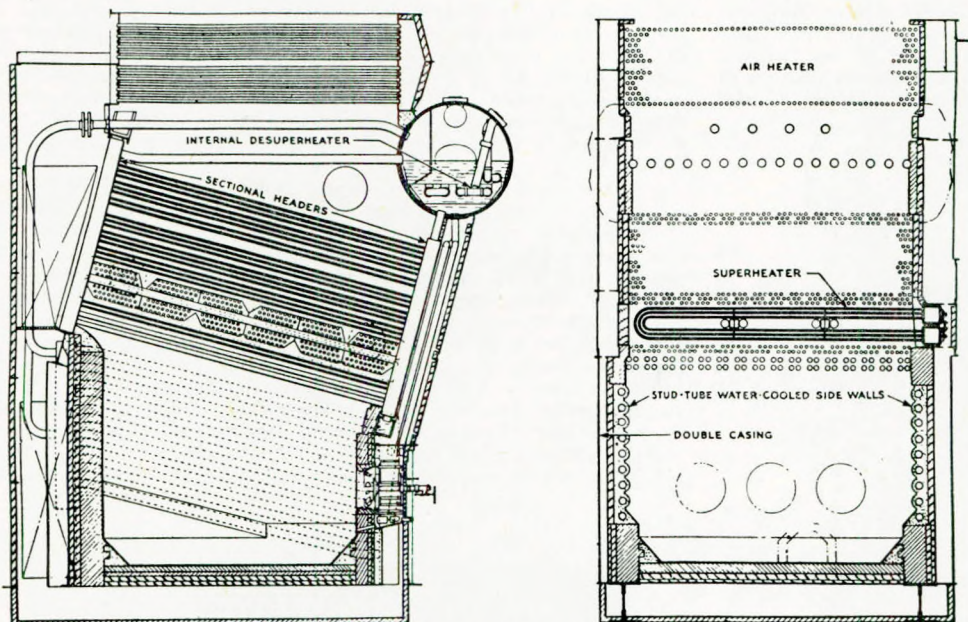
Longitudinal and front view sections of 1/2-in. tube single pass, header-type boiler with interdeck superheater and air heater.
